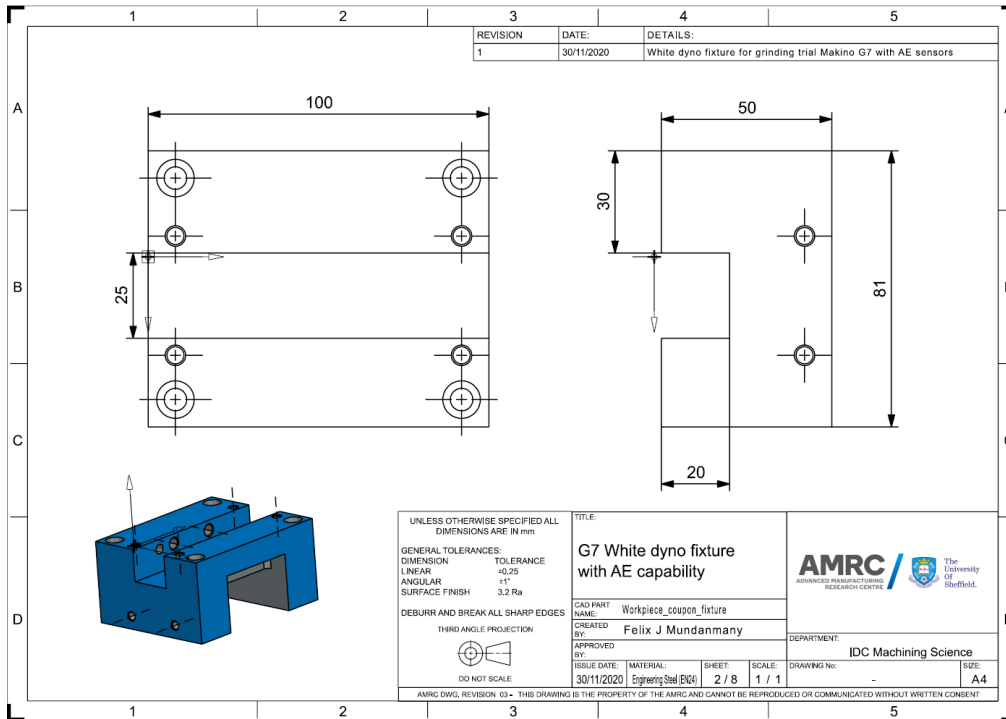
Drawing illustrating the cavity for coupons to be held within the workpiece fixture with general dimensions of the fixture stock for illustrative purposes.
